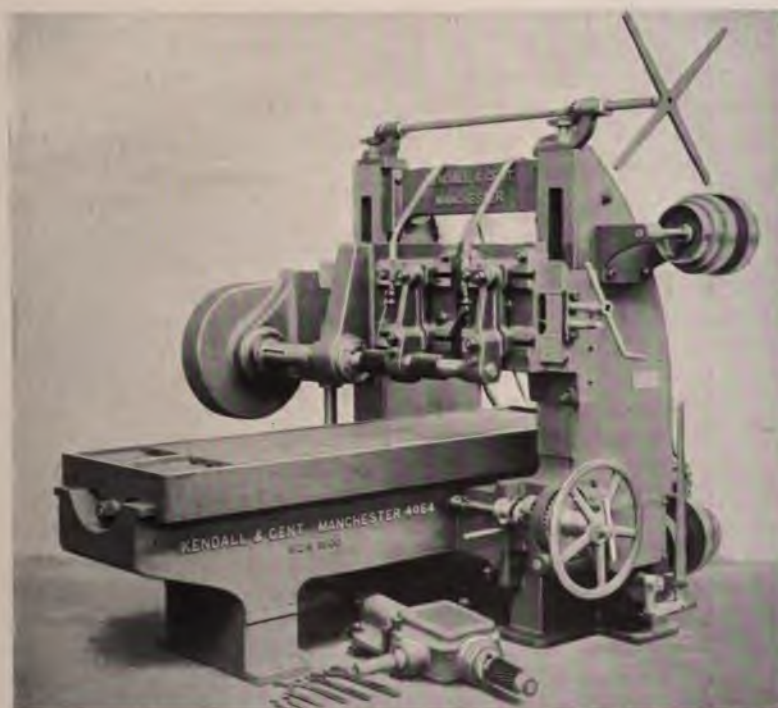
SINGLE-SPINDLE PLANO-MILLING MACHINE. (Kendall & Gent, Ltd.)
